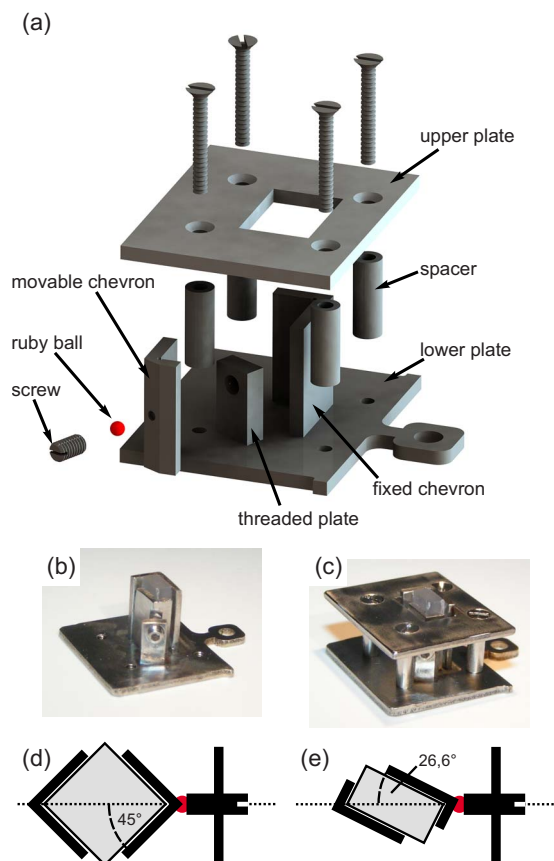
(Color online) (a) Sample holder for system 3 consisting of two parallel plates. The clamping mechanism is mounted onto the lower plate using the height between the two plates for secure sample holding and large area electrical contact. (b) Clamping mechanism mounted on the lower plate. (c) Assembled sample holder. (d) Line of force in a sample holder for samples with a quadratic profile. The chevrons are tilted by  $45^\circ$ . (e) In order to apply the clamping force through two opposite edges of crystals with a rectangular profile the chevron must be tilted by an angle of  $\alpha = \arctan(\text{shortside}/\text{longside})$  with respect to the line of force. This amounts to  $26.6^\circ$  for a crystal with 1:2 aspect ratio.
